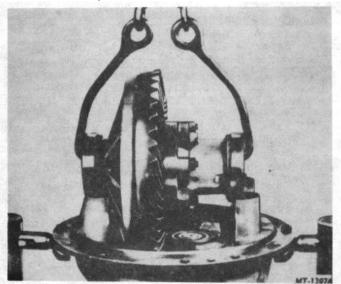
Lifting Differential from Carrier DIFFERENTIAL AND DRIVE GEAR
